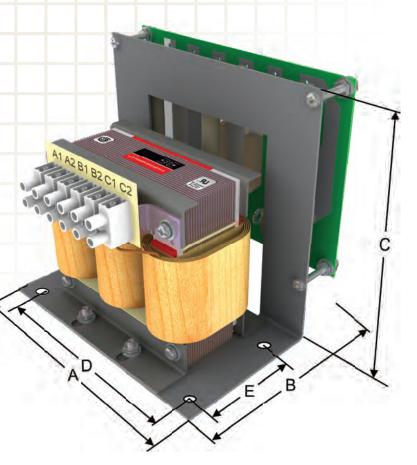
Dimensioned view of a Rex Motor Guarding Filter
